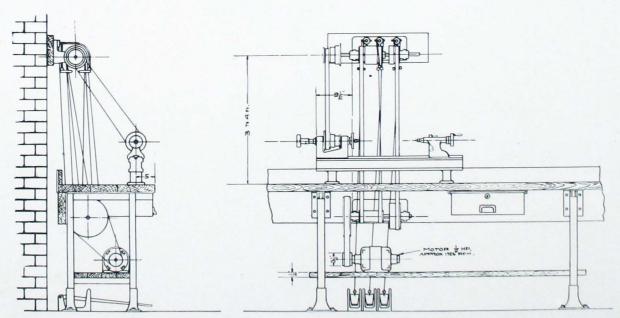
Lathe on Wall Bench, Countershaft on Wall, Individual Motor Drive.
